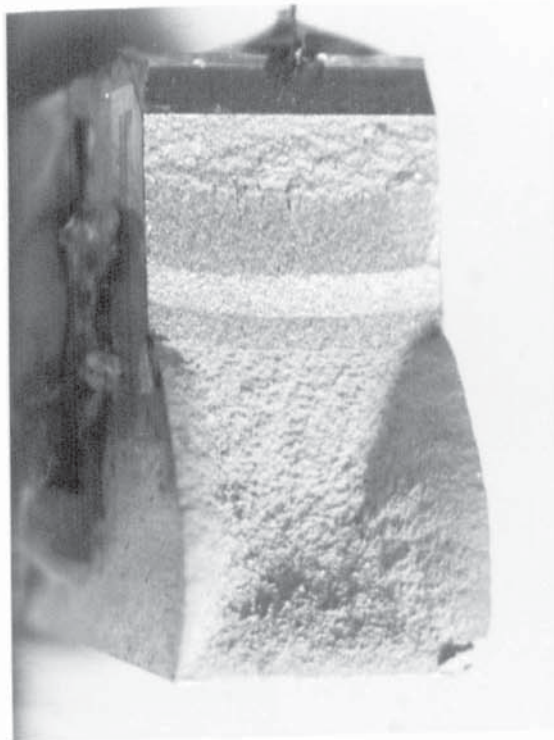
Through-Thickness Crack with Crack Front Markings Produced by Load Changes for Experimental P.D. Calibration. ($R = 0.1$ and 0.5).
